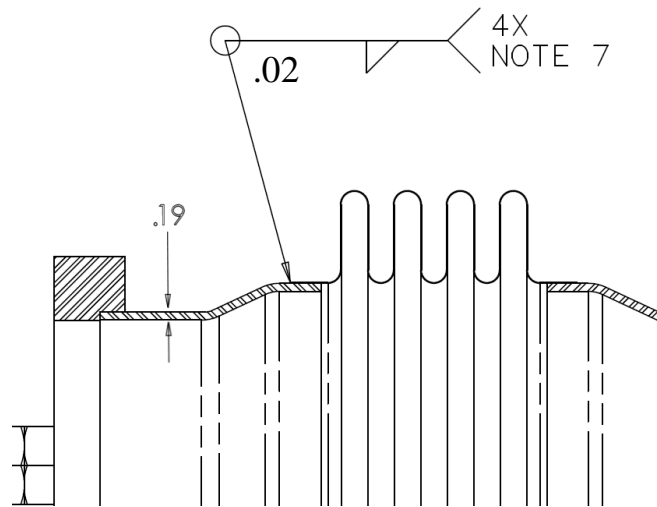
Weld Dimensions: Bellows-Ring Flanges connections.
